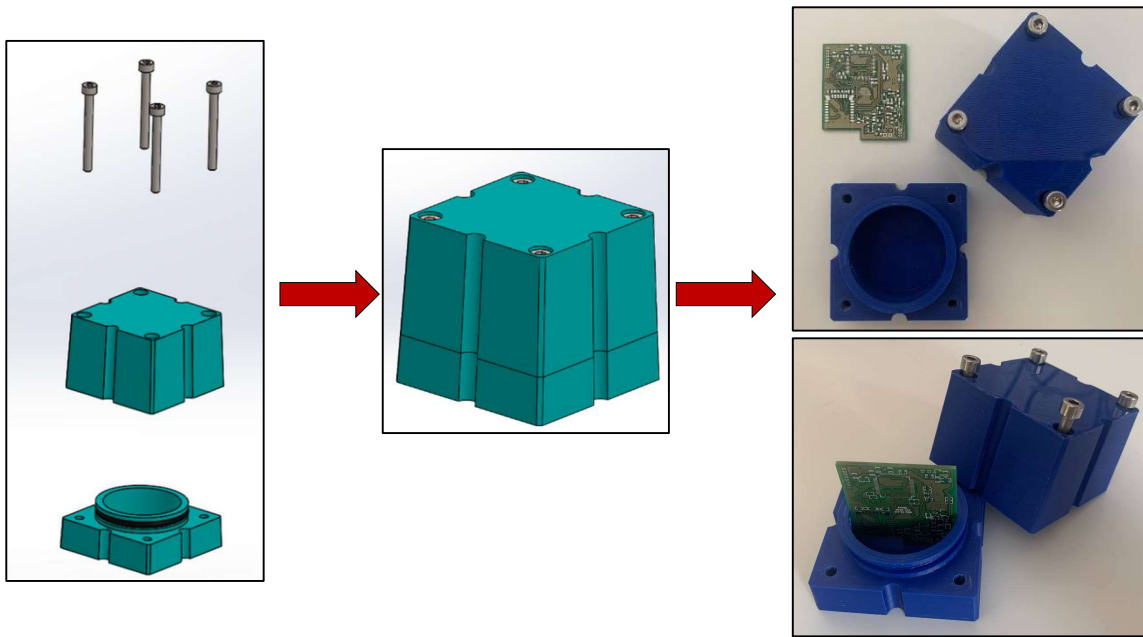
CAD drawings and 1<sup>st</sup> SmartAntifer prototype (September 2020).
